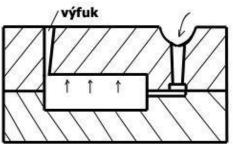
Filling the mould cavity. Výfuk – whistler
